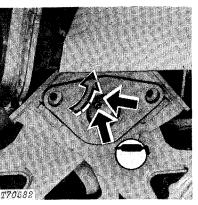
Shear Blade Pivot Shaft (Rear) (3 Points)
